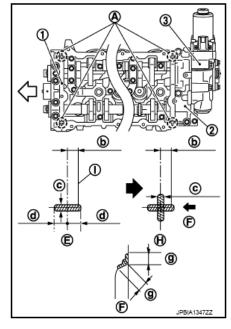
Identifying Liquid Gasket Applying Positions Courtesy of NISSAN MOTOR CO., U.S.A.
